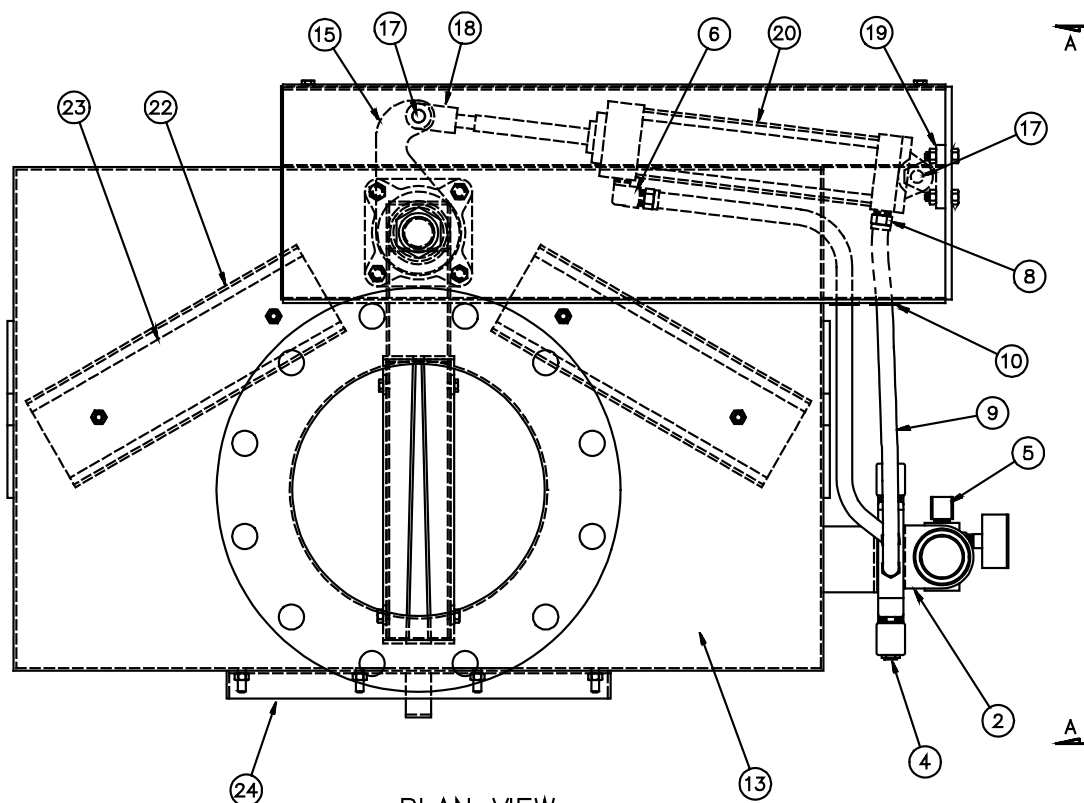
, GRA SAMPLER PARTS DRAWING
